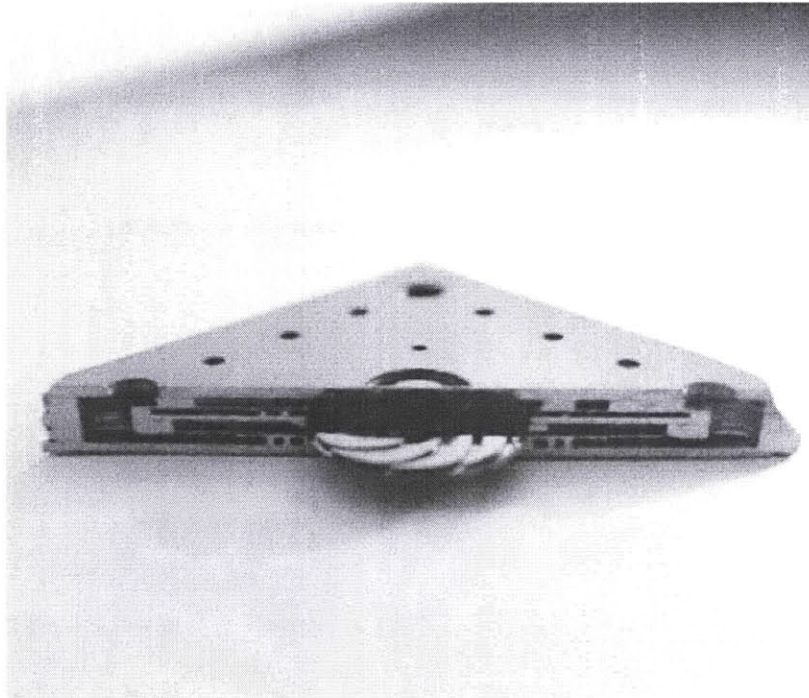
Cross-sectioned die showing rotor and static structure.
